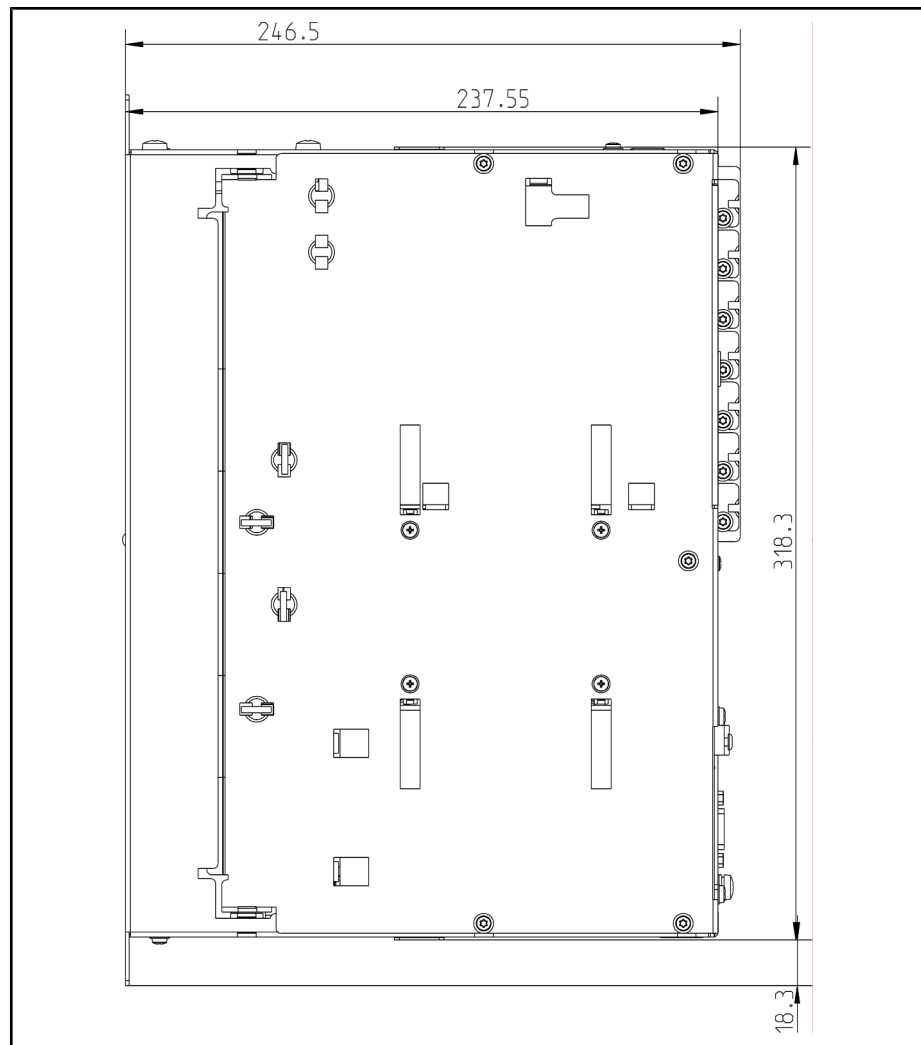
Mounting specifications for vertical mounting with connector panel in forward direction
